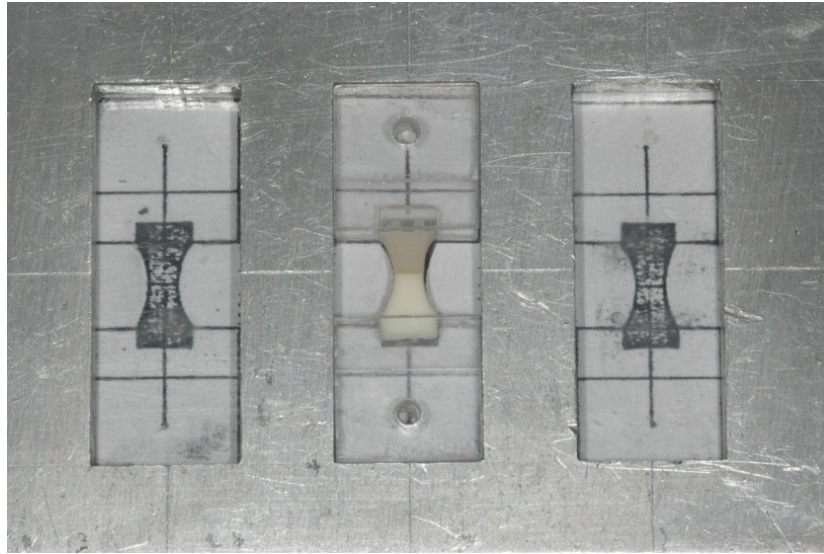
Technique to assemble a mini-dumbbell bonded specimen to PMMA jigs
